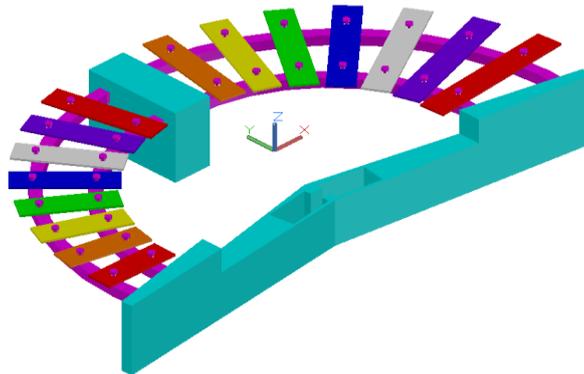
The CAD drawing 3D view of automatic playing xylophone
